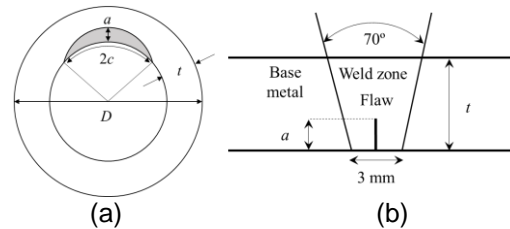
Schematics of cross-section of surface crack and girth welding configuration
